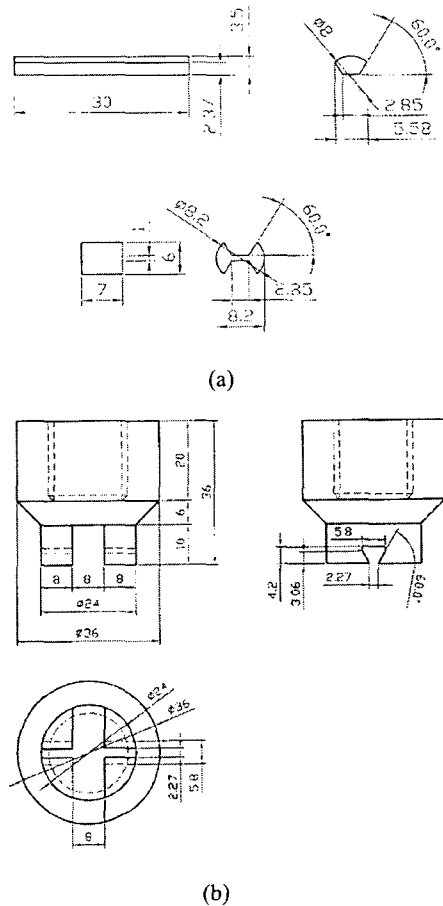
Testing Devices (a) pin and central piece (b) jig (unit: mm)
